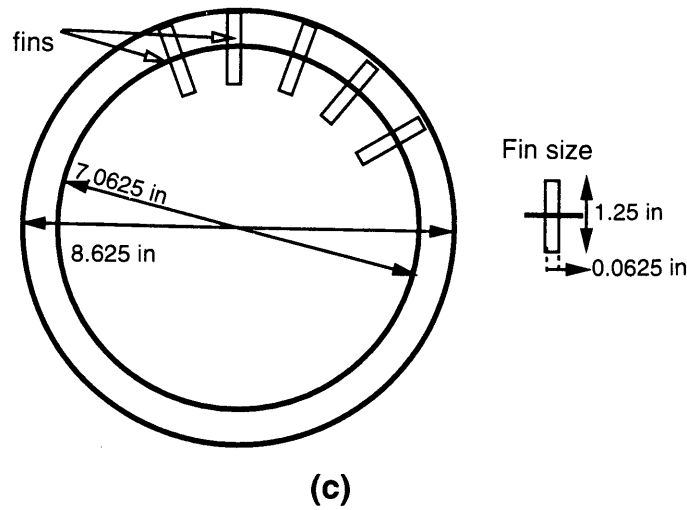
Cross-sectional dimensions of fabricated heat exchanger (Ref[21])
